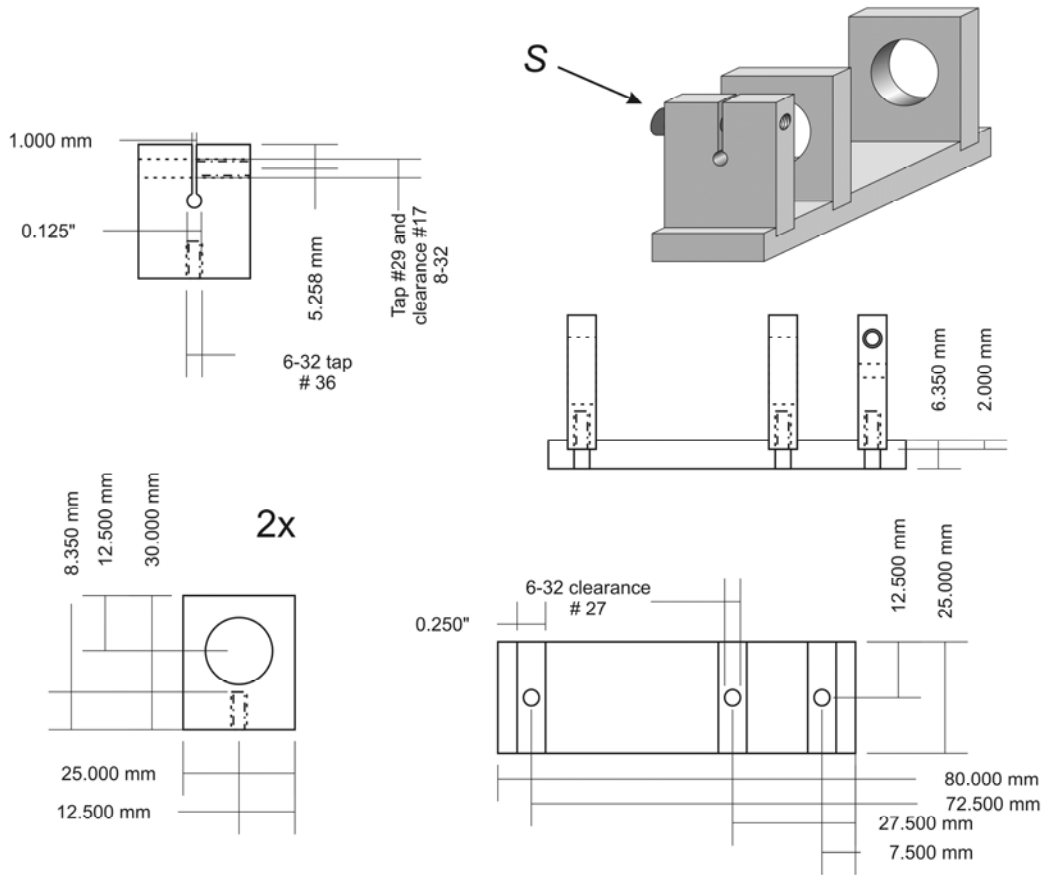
Alignment stage for ferrule holder and ruby template. The ferrule holder (part 1) fits through the two bigger holes with a tight fit but enough clearance to spin freely. The two big holes and the small hole in the front, which houses the interchangeable template (part 3), are carefully aligned in X and Y direction. *S* denotes the screw that fixes the template in place.
